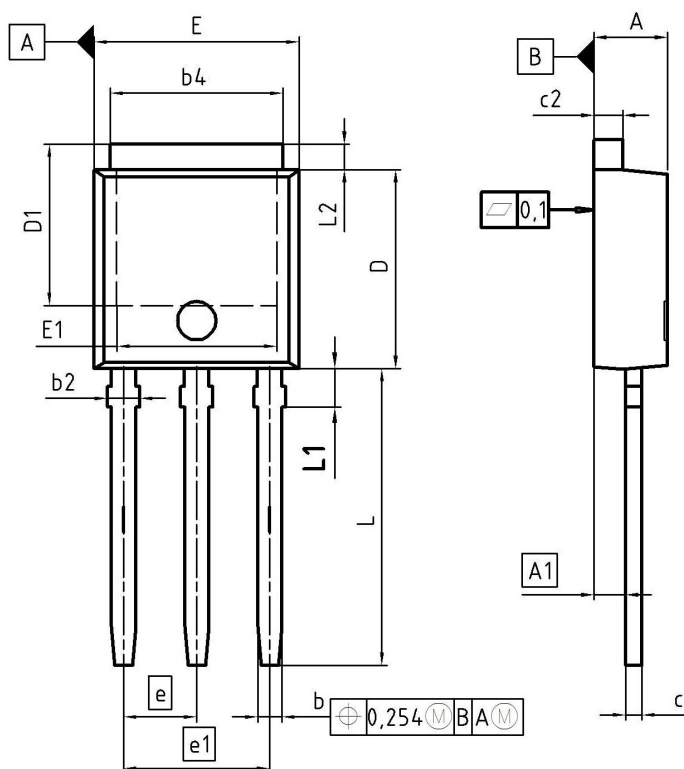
Outline PG-TO 252, dimensions in mm/inches
